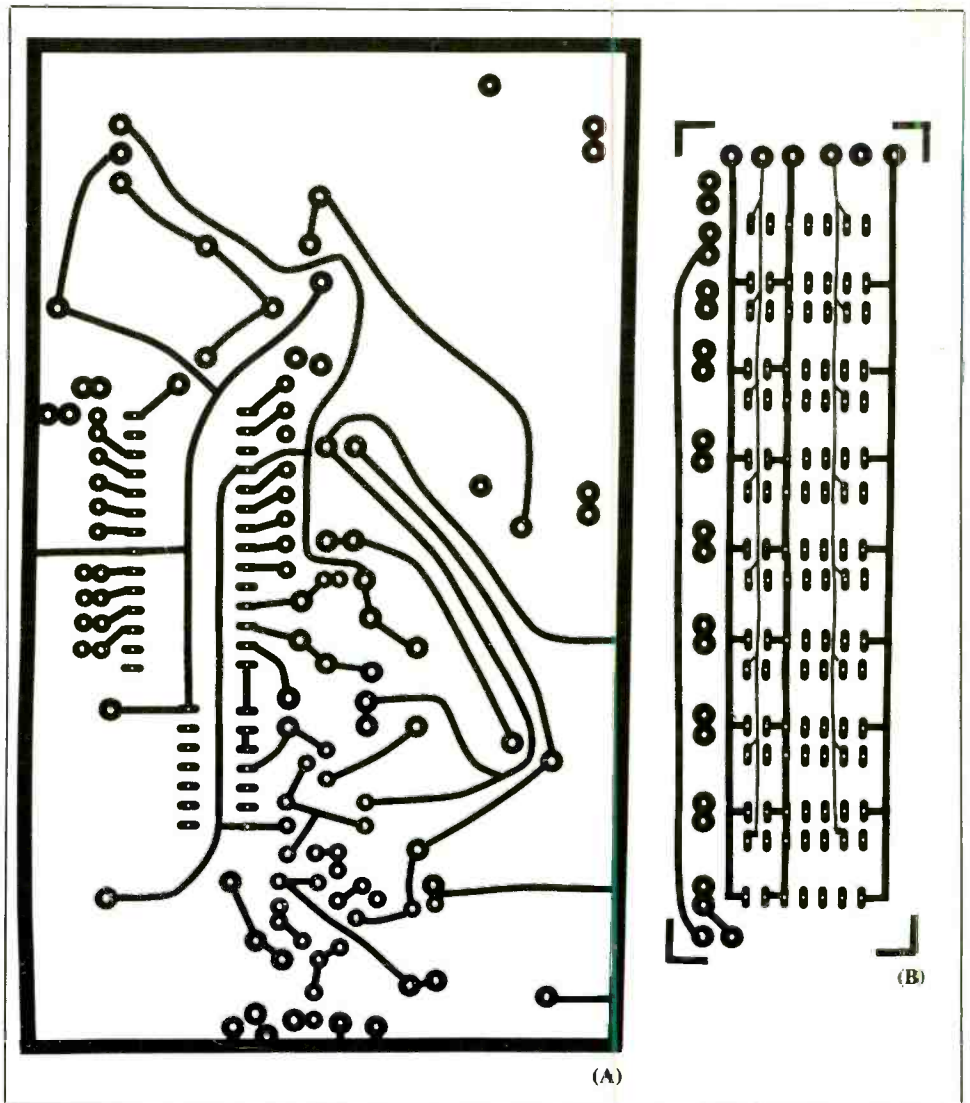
Actual-size etching-and-drilling guides for main and display boards.
